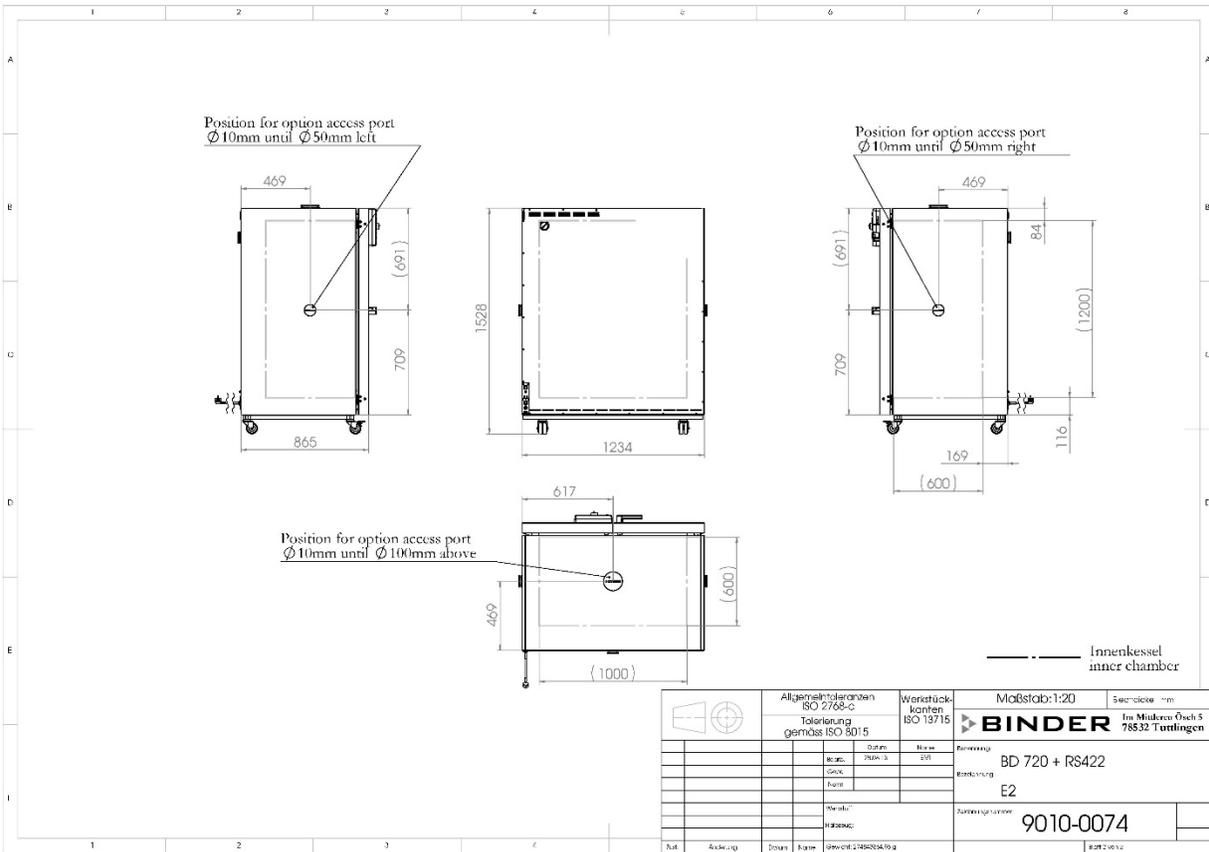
Position of the BD 720 additional access ports (all dimensions in mm)
